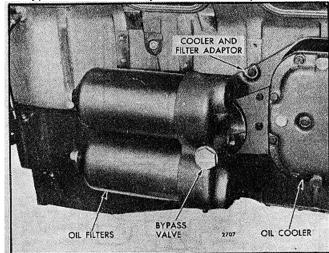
Typical Full-Flow Oil Filter Mounting (12V Engine)
